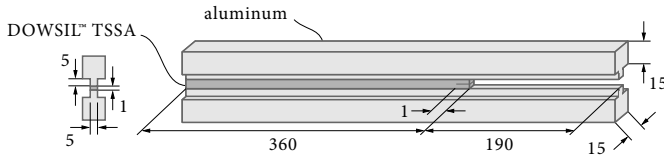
Out-of-plane shear double cantilever beam specimen of DOWSIL™ TSSA. Dimensions in mm.
